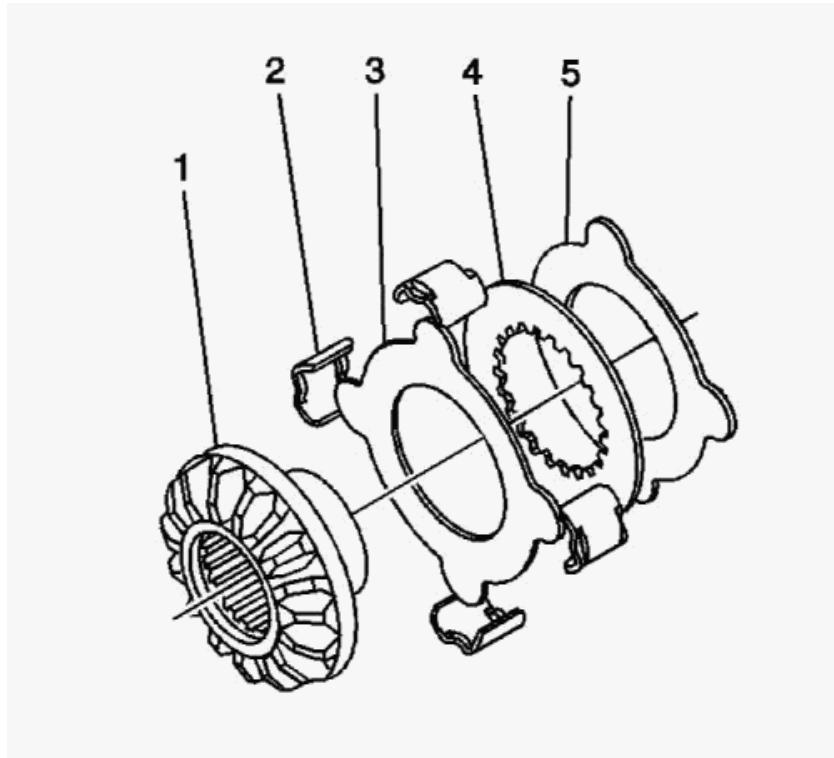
Guide Clips, Clutch Discs And Splined Discs
